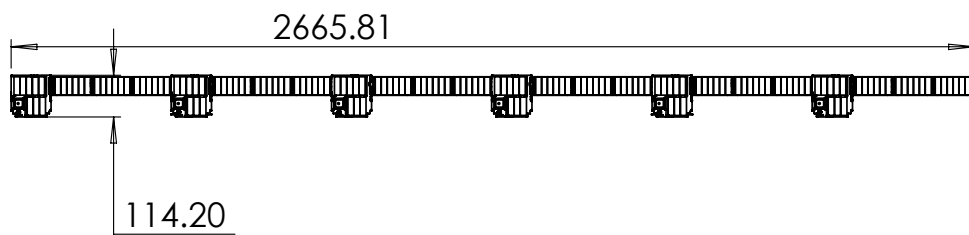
Single Frame ThinSat Unit Detail, Dimensions in mm
